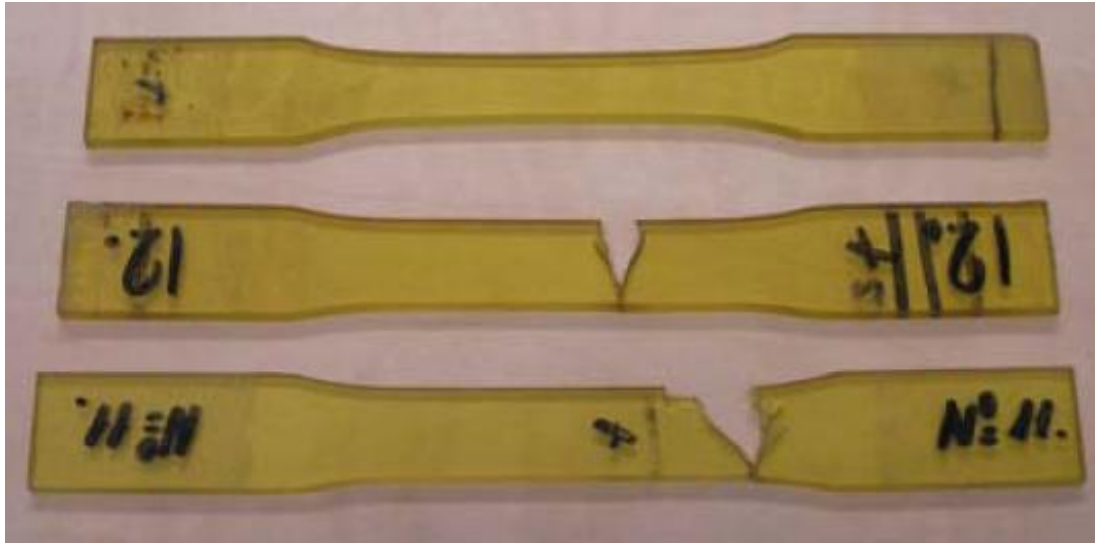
Machined and polished resin casting strip, before and after failure
